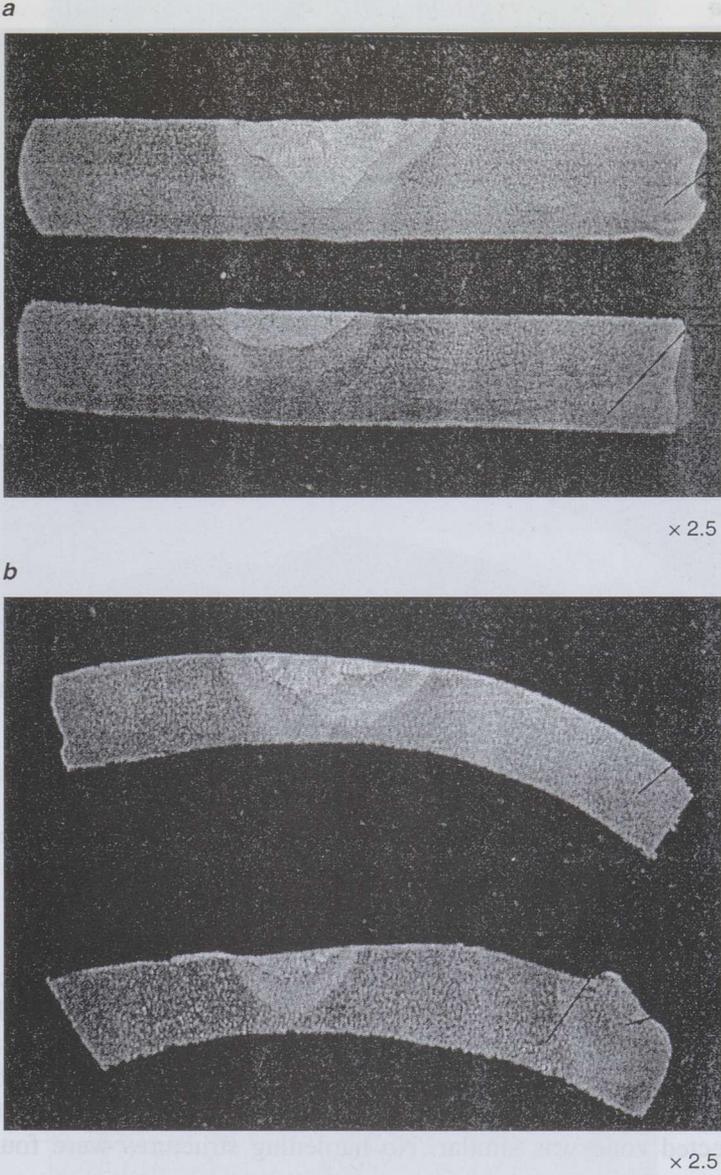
Macrosection of test tubes after overlay welding:
